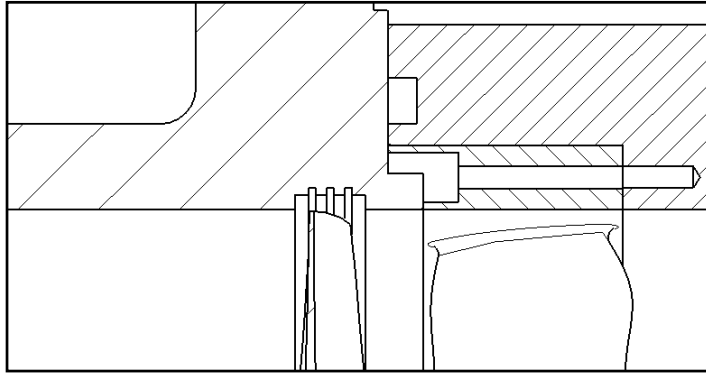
A Groove for a Wax Layer is machined into the Rotor Casing.
